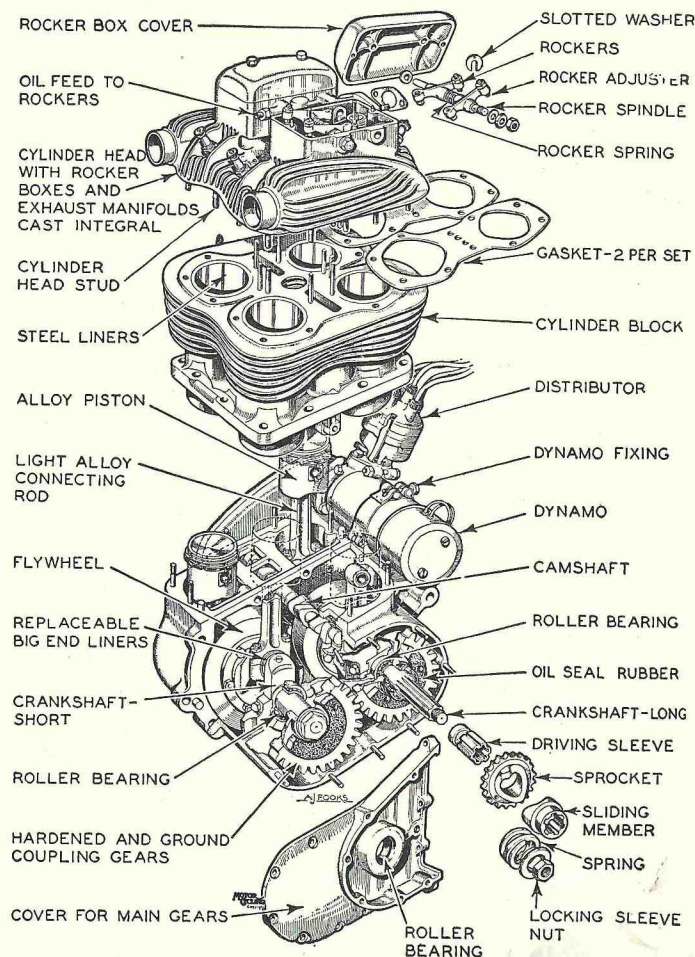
EXPLODED VIEW OF THE ARIEL 4G Mk. I 1000-C.C. LIGHT-ALLOY ENGINE (1949-52).
